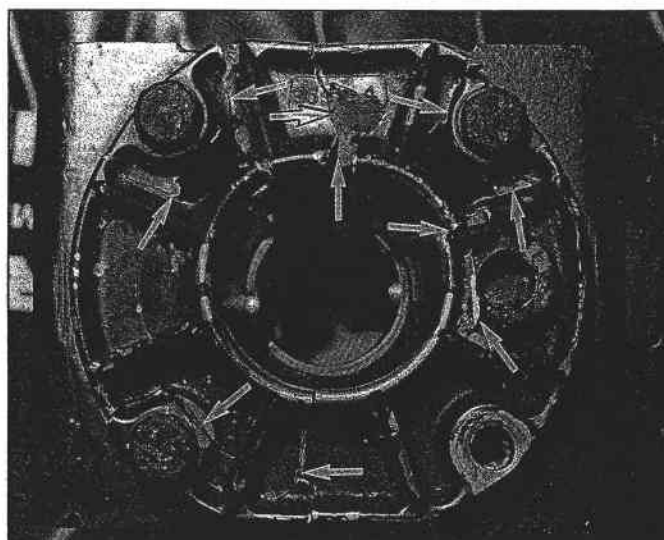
Accident gear box - fractured and reassembled input bearing cap. Arrows indicate bearing cap fractures.
